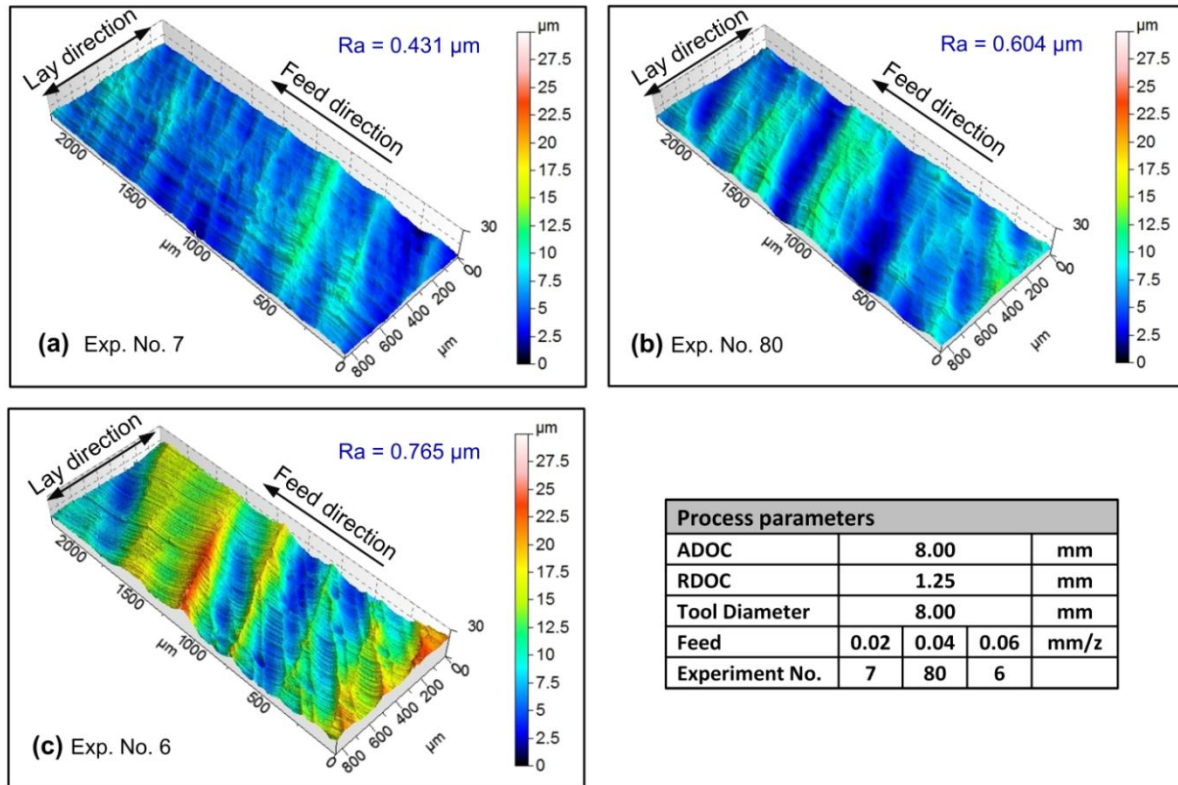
3-D profiles of workpiece surfaces using 8 mm diameter tool at different feed values: (a) For experiment 7, (b) For experiment 80, (c) For experiment 6
